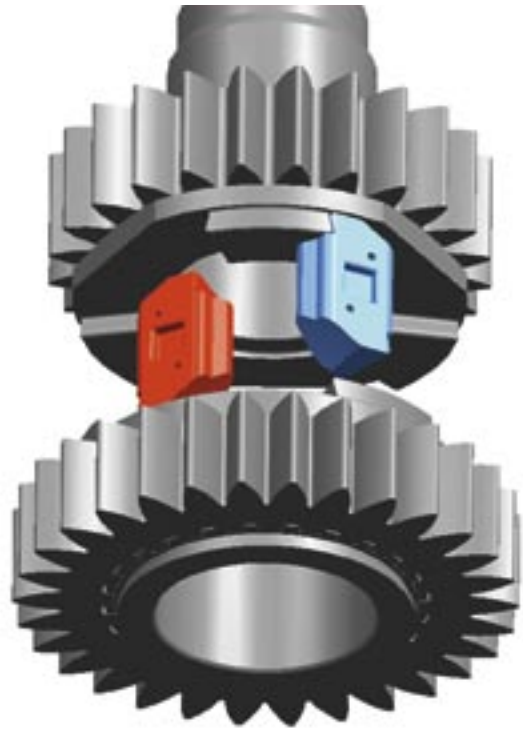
Free bullets (red) slide across to the second gear pair while loaded bullets (blue) remain engaged in first due to retention angle on the dog faces
